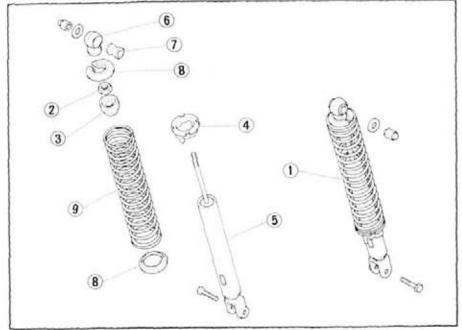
(1) Rear shock absorber assembly (2) Lock hut (10 mm)
